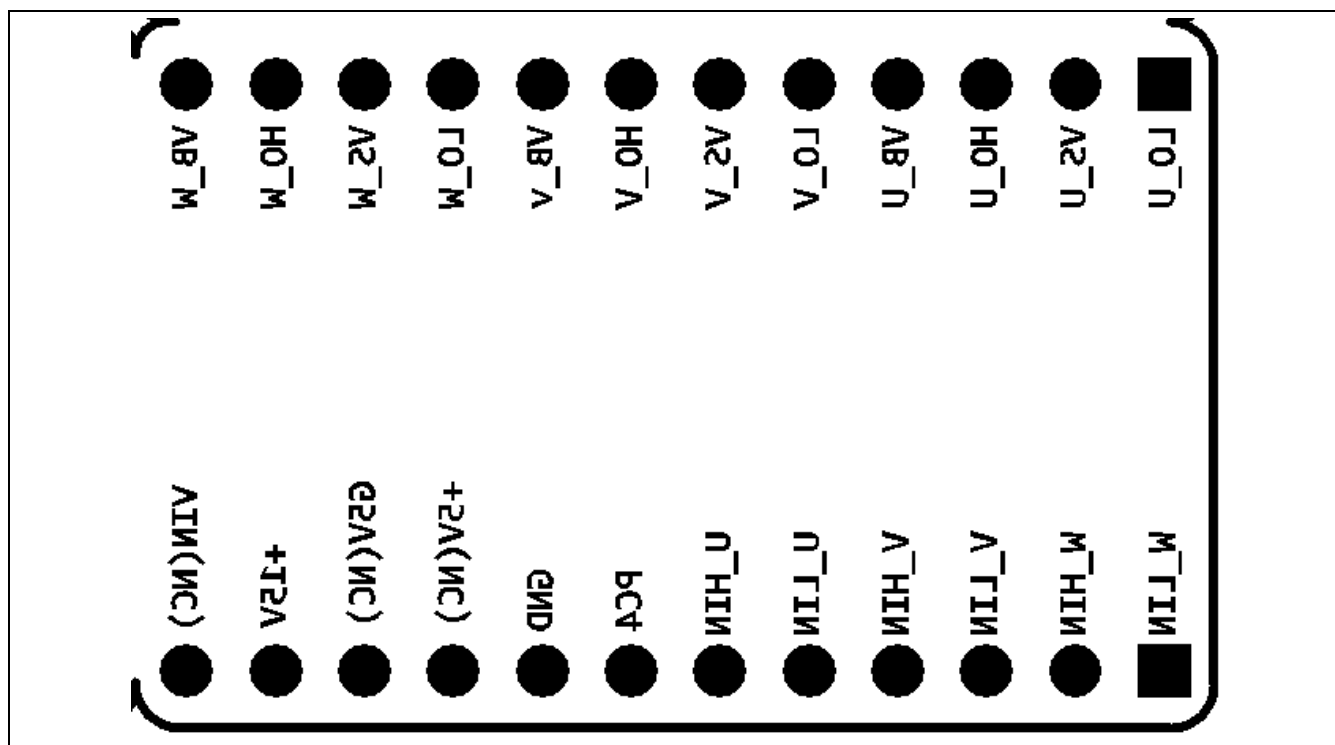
Gate Driver IR2101PCB Placement -Bottom
